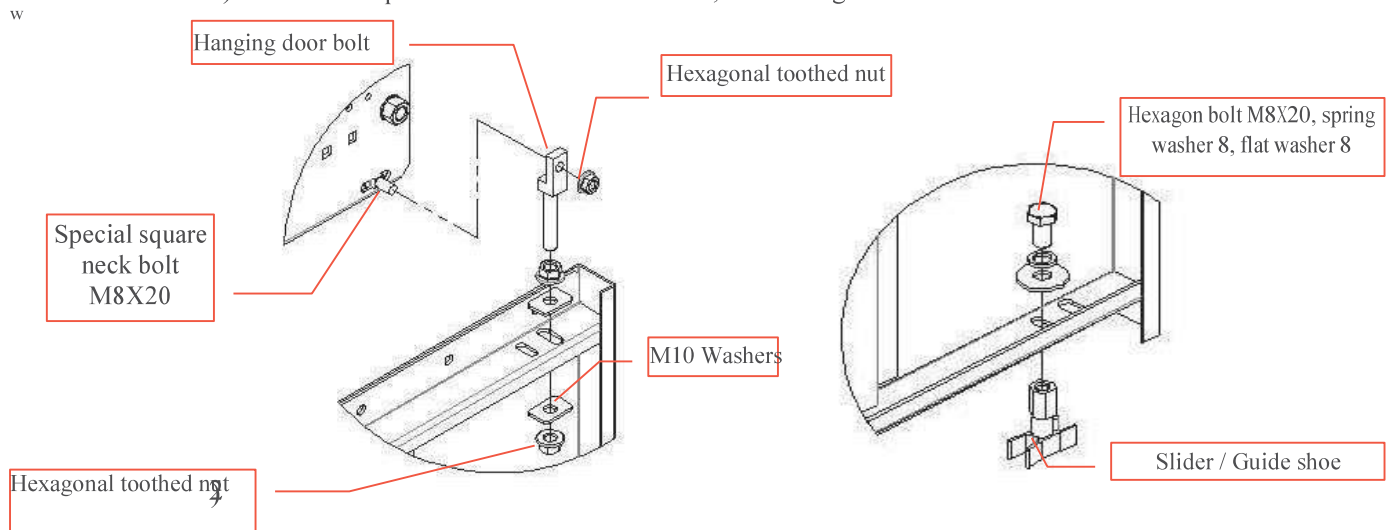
Installation of Sliders and Hanging Door Bolt
